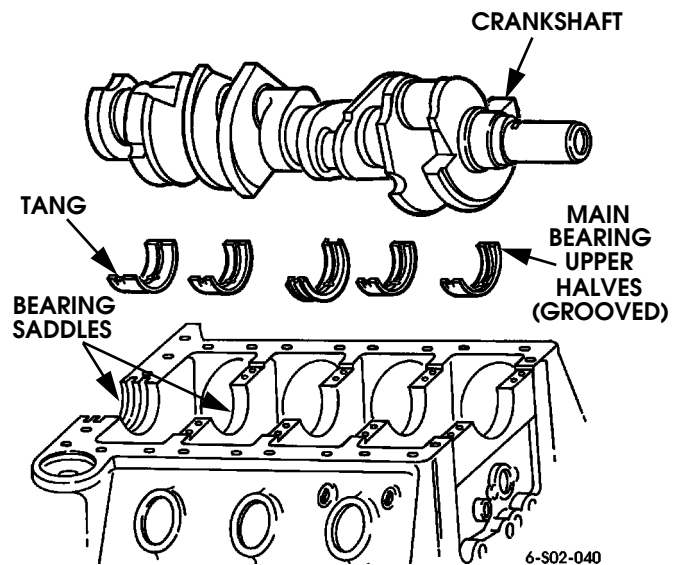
Installing Crankshaft and Main Bearing Upper Halves
